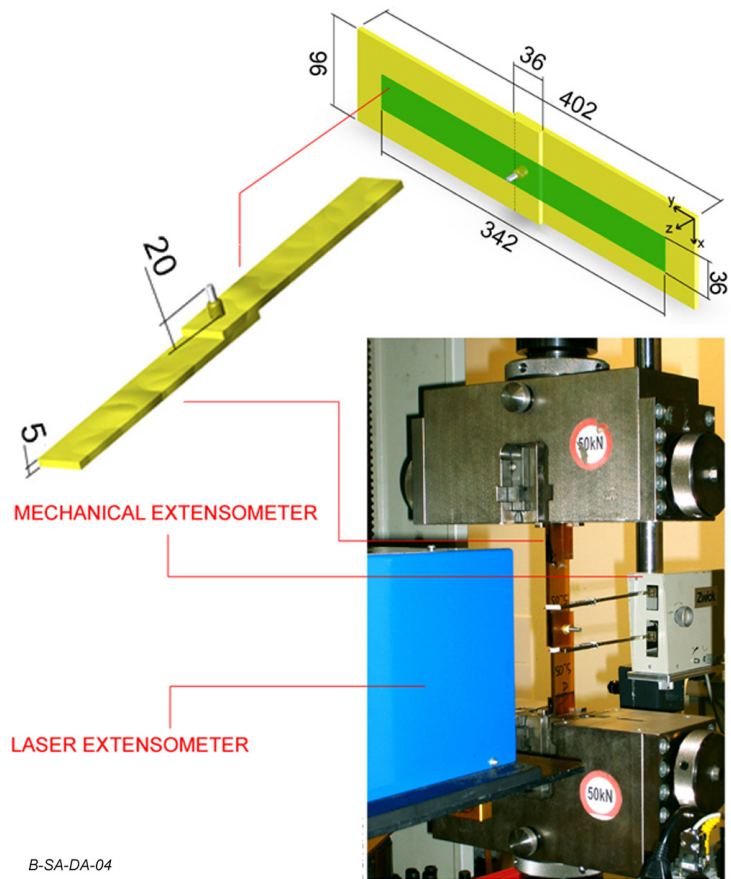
Lap shear testing of friction riveted joints. On the top right-hand side, the overlap joint coupons from where the lap shear specimens (on the top left-hand side) were extracted in accordance to ASTM-D-5961/D-5961M-05.
